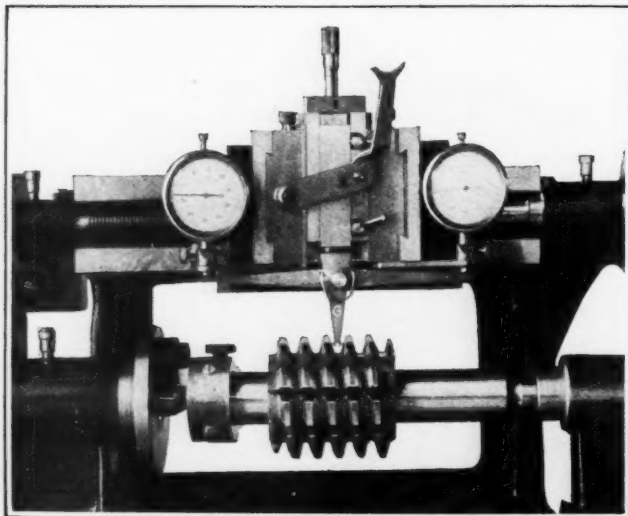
Close View of Indicator Carriage and Hob to be tested
